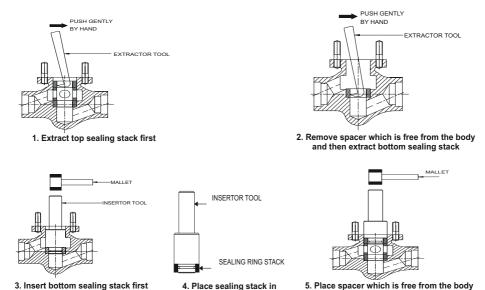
View showing extractor tool and insertor tool for sealing stack of piston valve of size DN15-40
